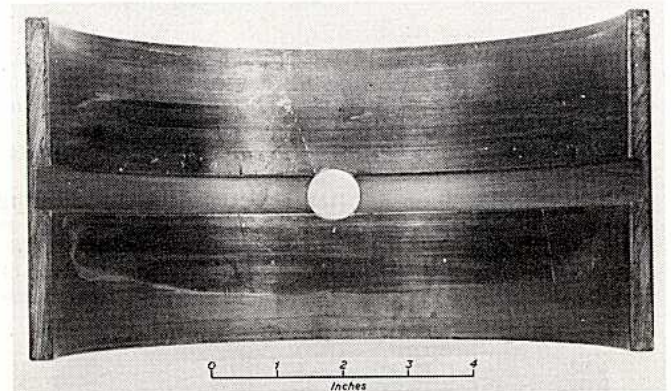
Overlay plated copper-lead bearing wiped due to barrelled journal
